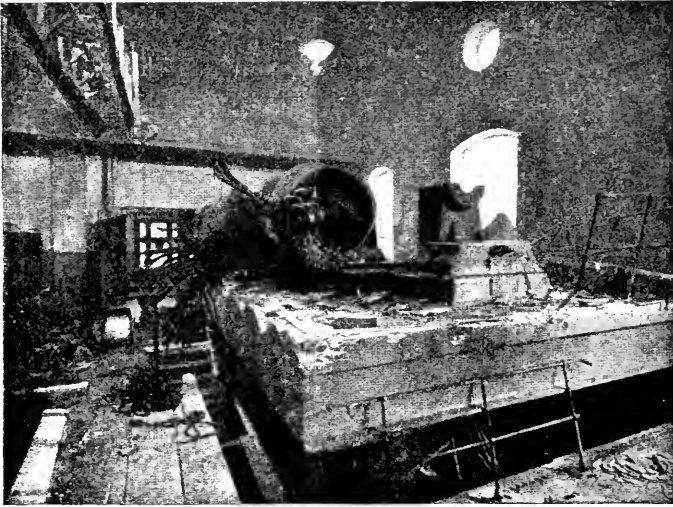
THE EXPLODED TURBO-GENERATOR.
